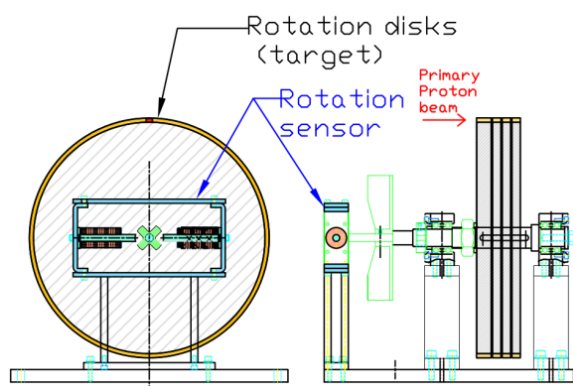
Schematic drawing of the rotation-target unit with the prototype of the rotation sensor.
